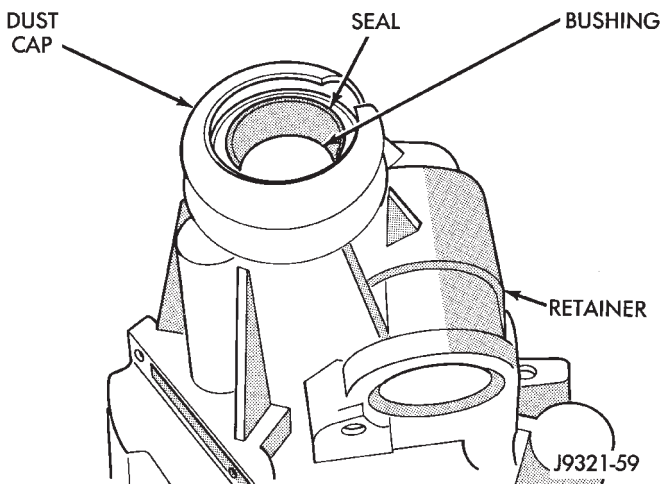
Rear Retainer Cap, Bushing And Seal Position
